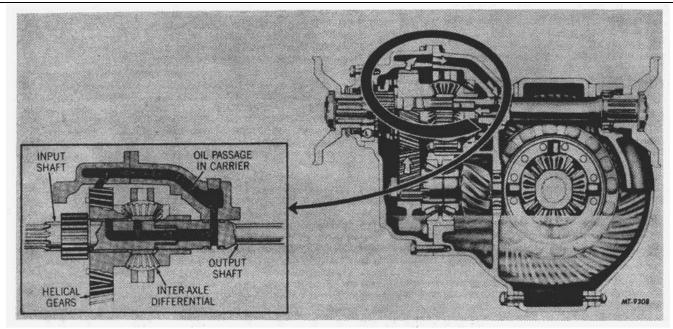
Cross Section View of Forward Rear Axle with Integral Power Divider
